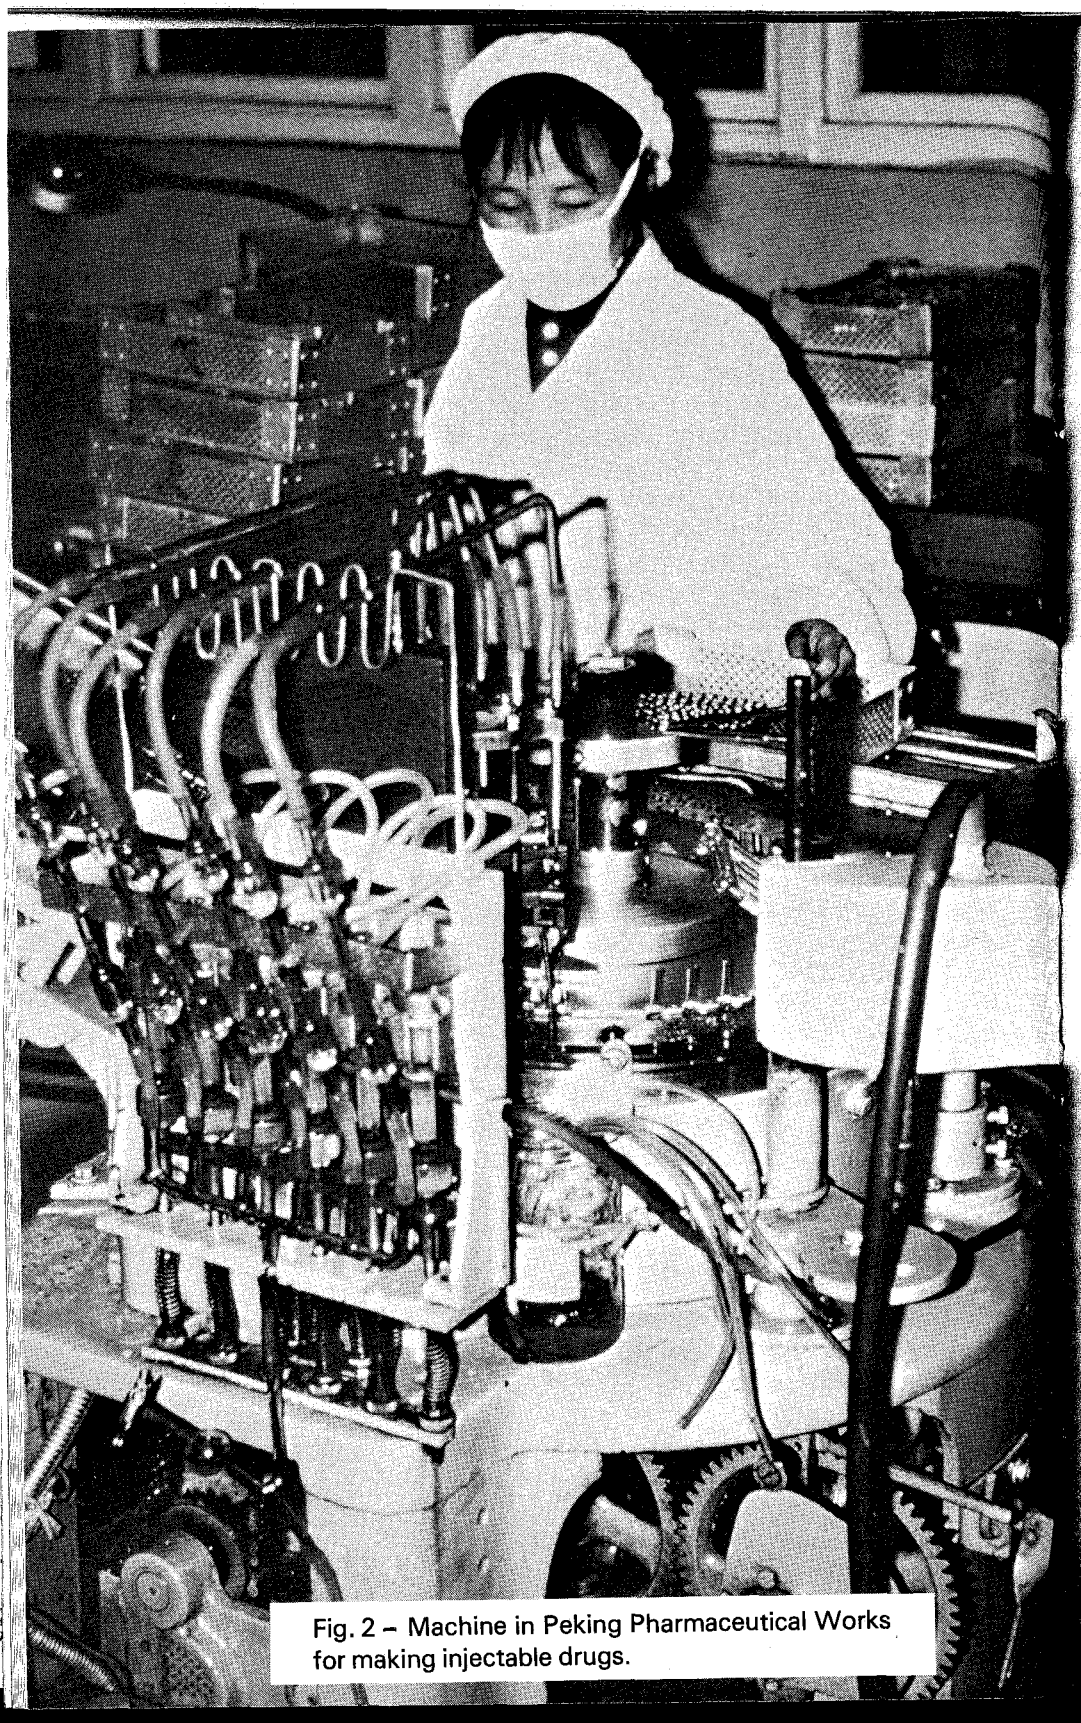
Machine in Peking Pharmaceutical Works for making injectable drugs.
